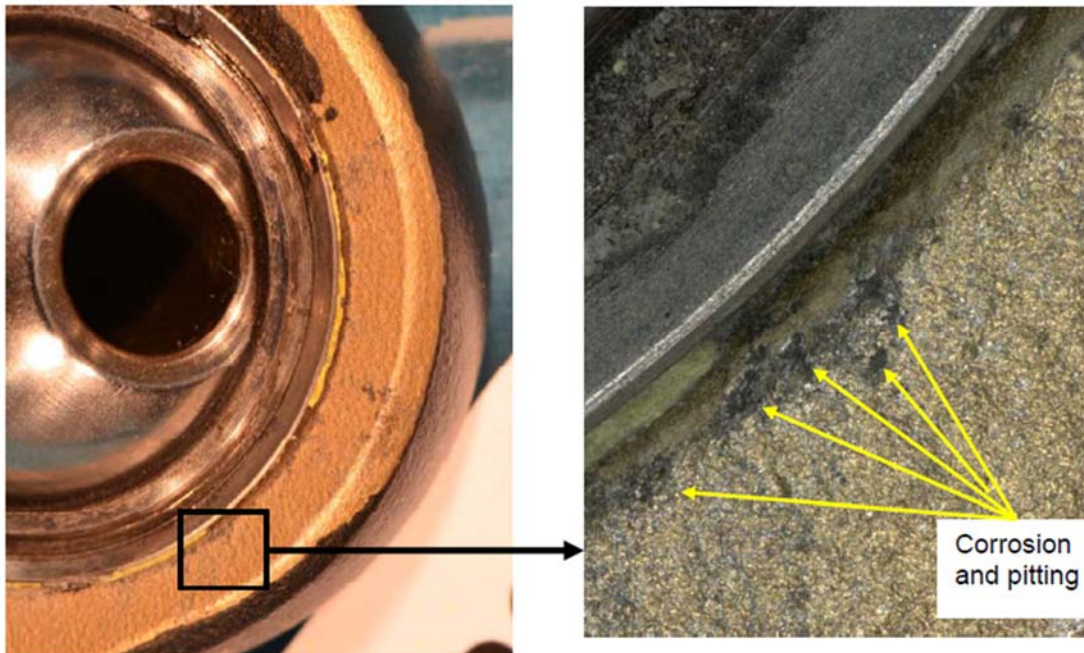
Corrosion and pitting observed on the chamfer of the crosshead-side spherical bearing of PCL S/N TE-0168. (photo courtesy of Bell Helicopter)
